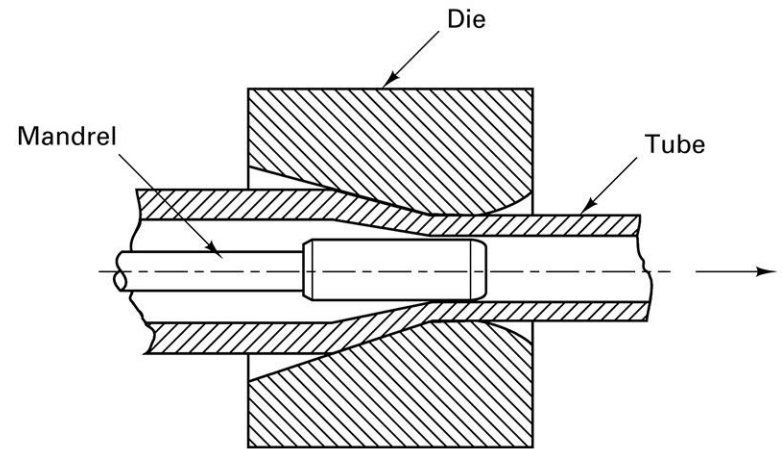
Cold-drawing smaller tubing from larger tubing. The die sets the outer dimension while the stationary mandrel sizes the inner diameter.
